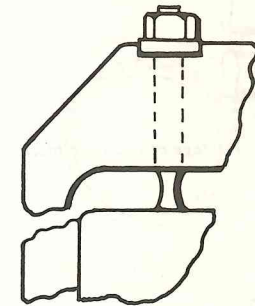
Wastage of girder stays, chamber knuckles and girders
